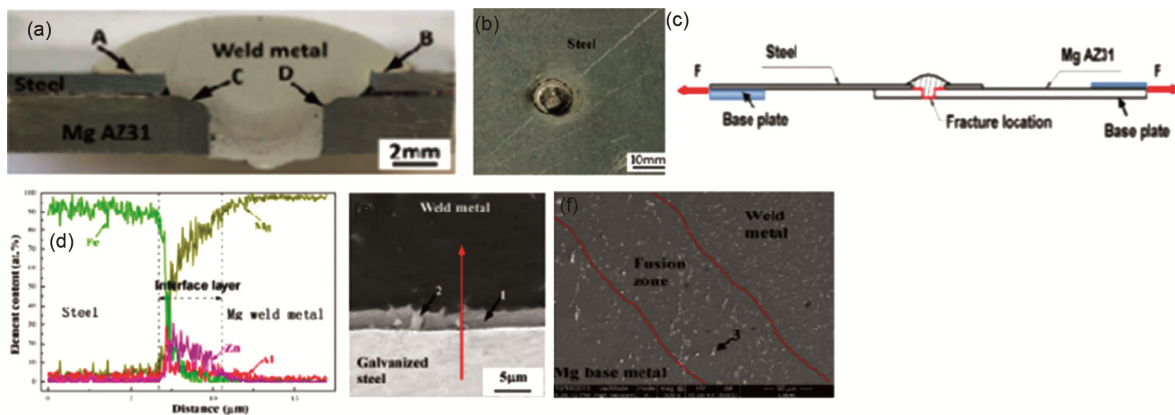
(a) Picture showing the inside view of a CMT welded joint between Mg AZ31 and galvanized steel with Mg AZ61 filler wire, (b) Fractured surface where the steel was pulled out, (c) Diagram showing the location of fracture at the FZ between the WM and the BM of Mg AZ31 in a joint made with Mg AZ61 wire and steel, (d) Close-up view of the interface zone A in Figure 6 (a), (e) line scanning examination of the enlarged feature in region B along the red line in Figure 6 (d) and (f) enlarged view of region C in Figure 6 (a)³⁹
